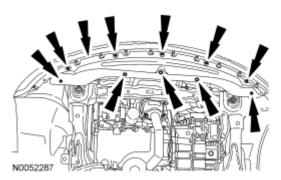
Locating RH Subframe-To-Lower Bumper Nuts Courtesy of FORD MOTOR CO.
